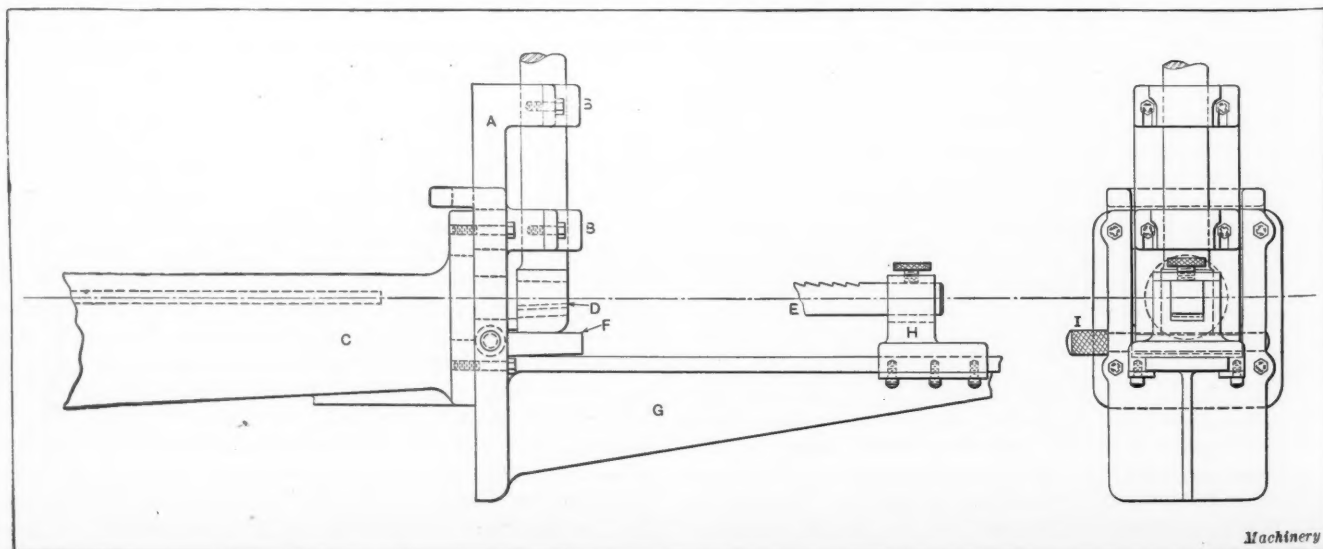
Front End of Broaching Machine with Fixture and Gun-barrel mounted in Place for broaching Breech Opening
